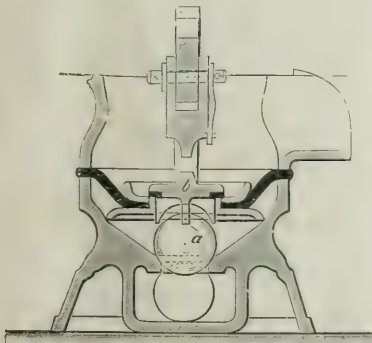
SECTION OF HONIG & MOCK PUMP.
